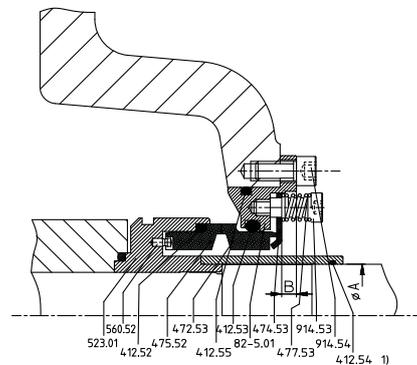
4K-120M mechanical seal<sup>39)</sup>
